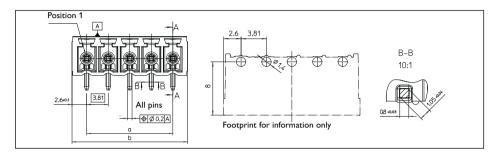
Layout and tolerance drawing of a typical THR component
